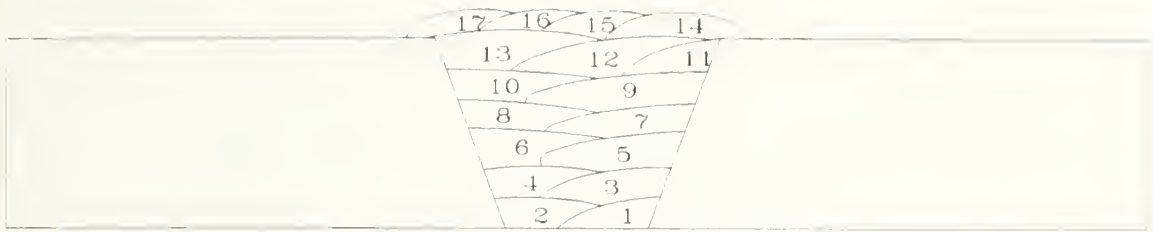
HY-100 Undermatched Specimen Weld Bead Arrangement
